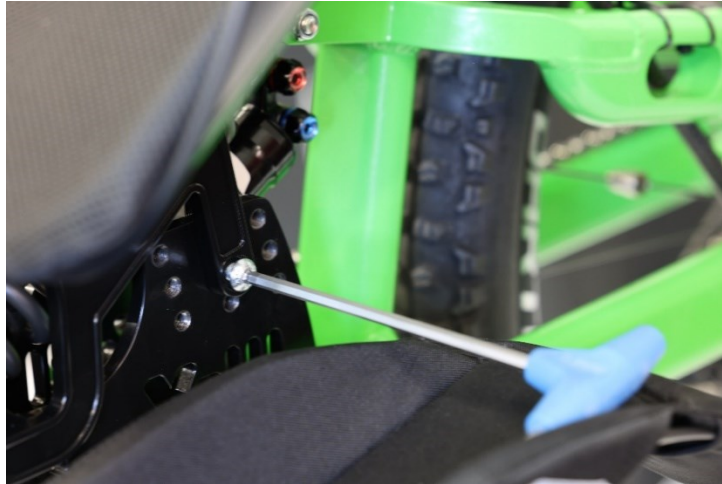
Mounting the seat – tightening the rear bracket mounting screw
